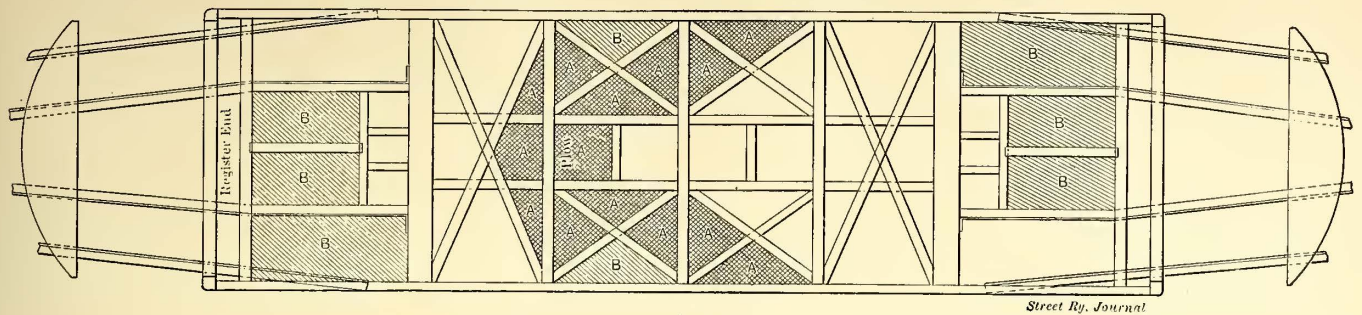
TIMBER PLAN OF WASHINGTON VESTIBULE CAR, SHOWING SPACES IN WHICH UNDERSIDE OF FLOOR IS PROTECTED WITH FIREPROOF MATERIAL
